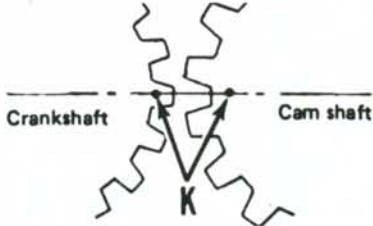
Align crankshaft and camshaft timing marks (K) during assembly.
